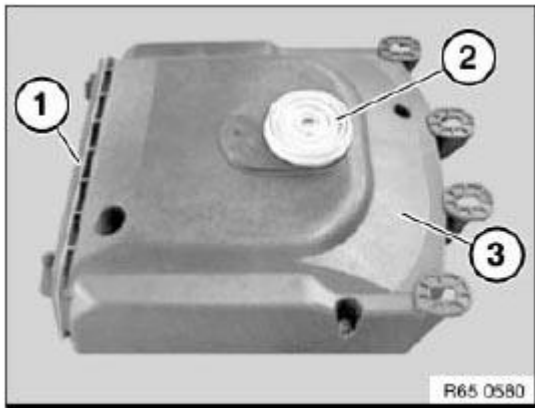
Identifying Seal, Rubber Damper And Bass Speaker
